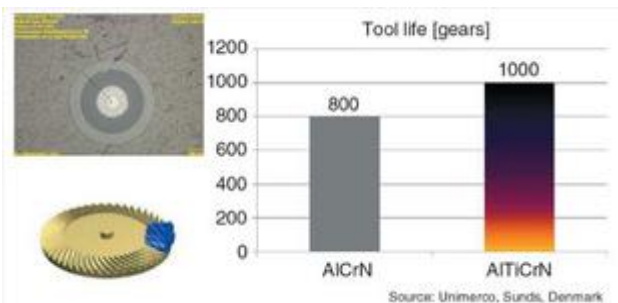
Planetary gear cutting using AlTiCrN coated tool: material 212M, width of workpiece 63 mm, tools HSS, $\varnothing 95 \times 150$ mm, roughing: $v_c = 120$ m/min, $f = 2.0$ mm, finishing: $v_c = 140$ m/min, $f = 1.5$ mm, criterion of tool life is 200 gears without profile failure with very tight tolerances.
